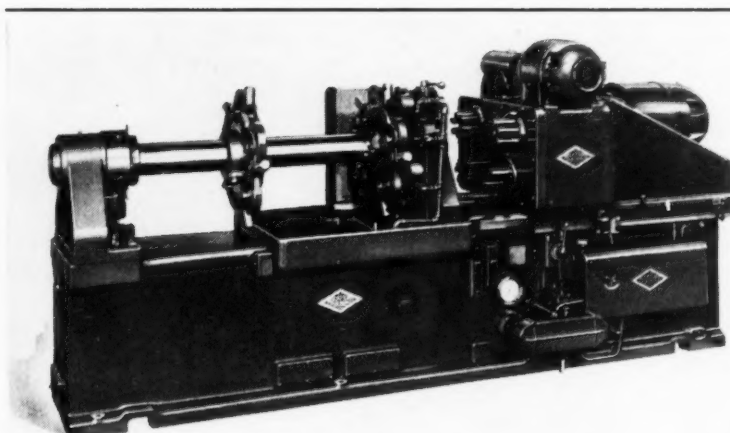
Hydraulically Operated Machine Built by the Rockford Drilling Machine Co. for Performing a Variety of Operations on Crankshafts
